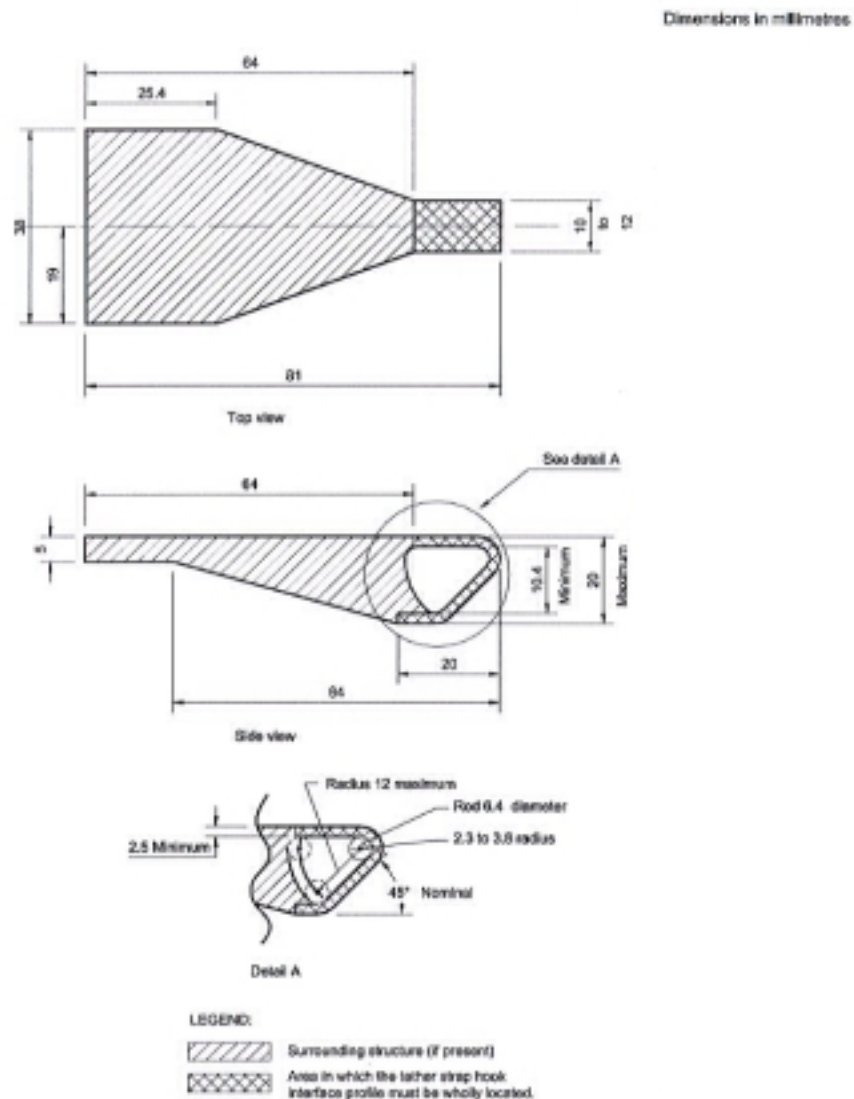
ISOFIX Top tether connector (hook type) dimensions
